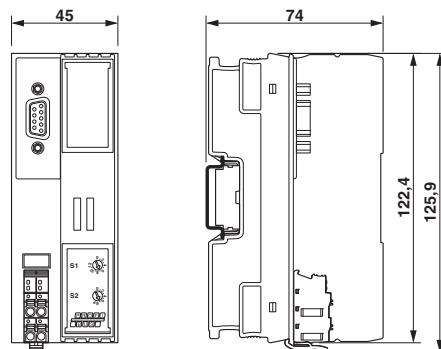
Nominal dimensions of a controller/bus coupler housing with separate bus base (type BK, e.g., AXL F BK PB, AXC 1050)
